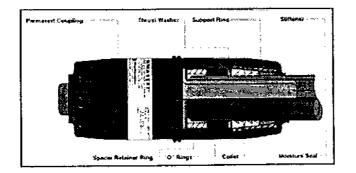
Stab Type Fitting 2.10 Mechanical Bolt Type Couplings
